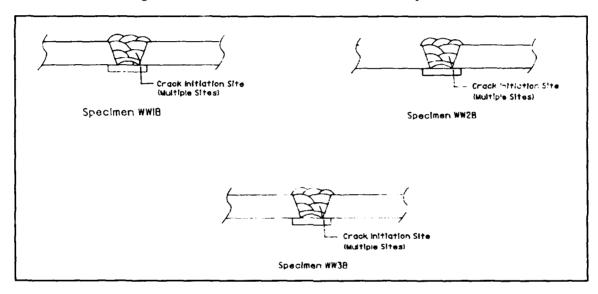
Failure Locations of Wet Weld Specimens (with Backing Bar)
